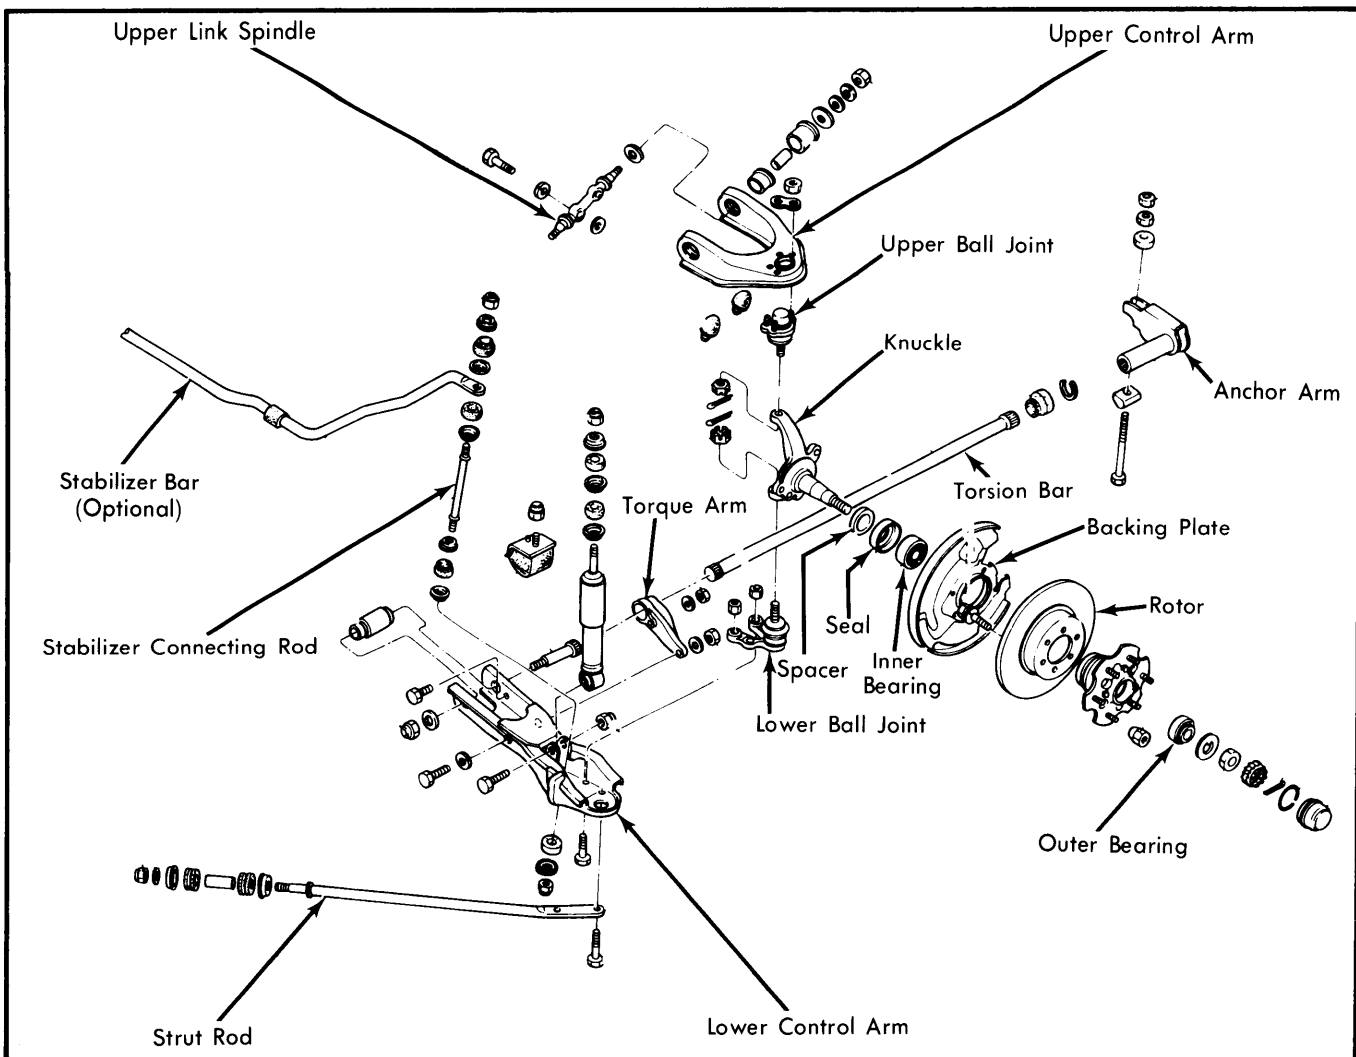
Exploded View of Datsun Pickup Front Suspension (2-WD Shown, 4-WD Similar)
